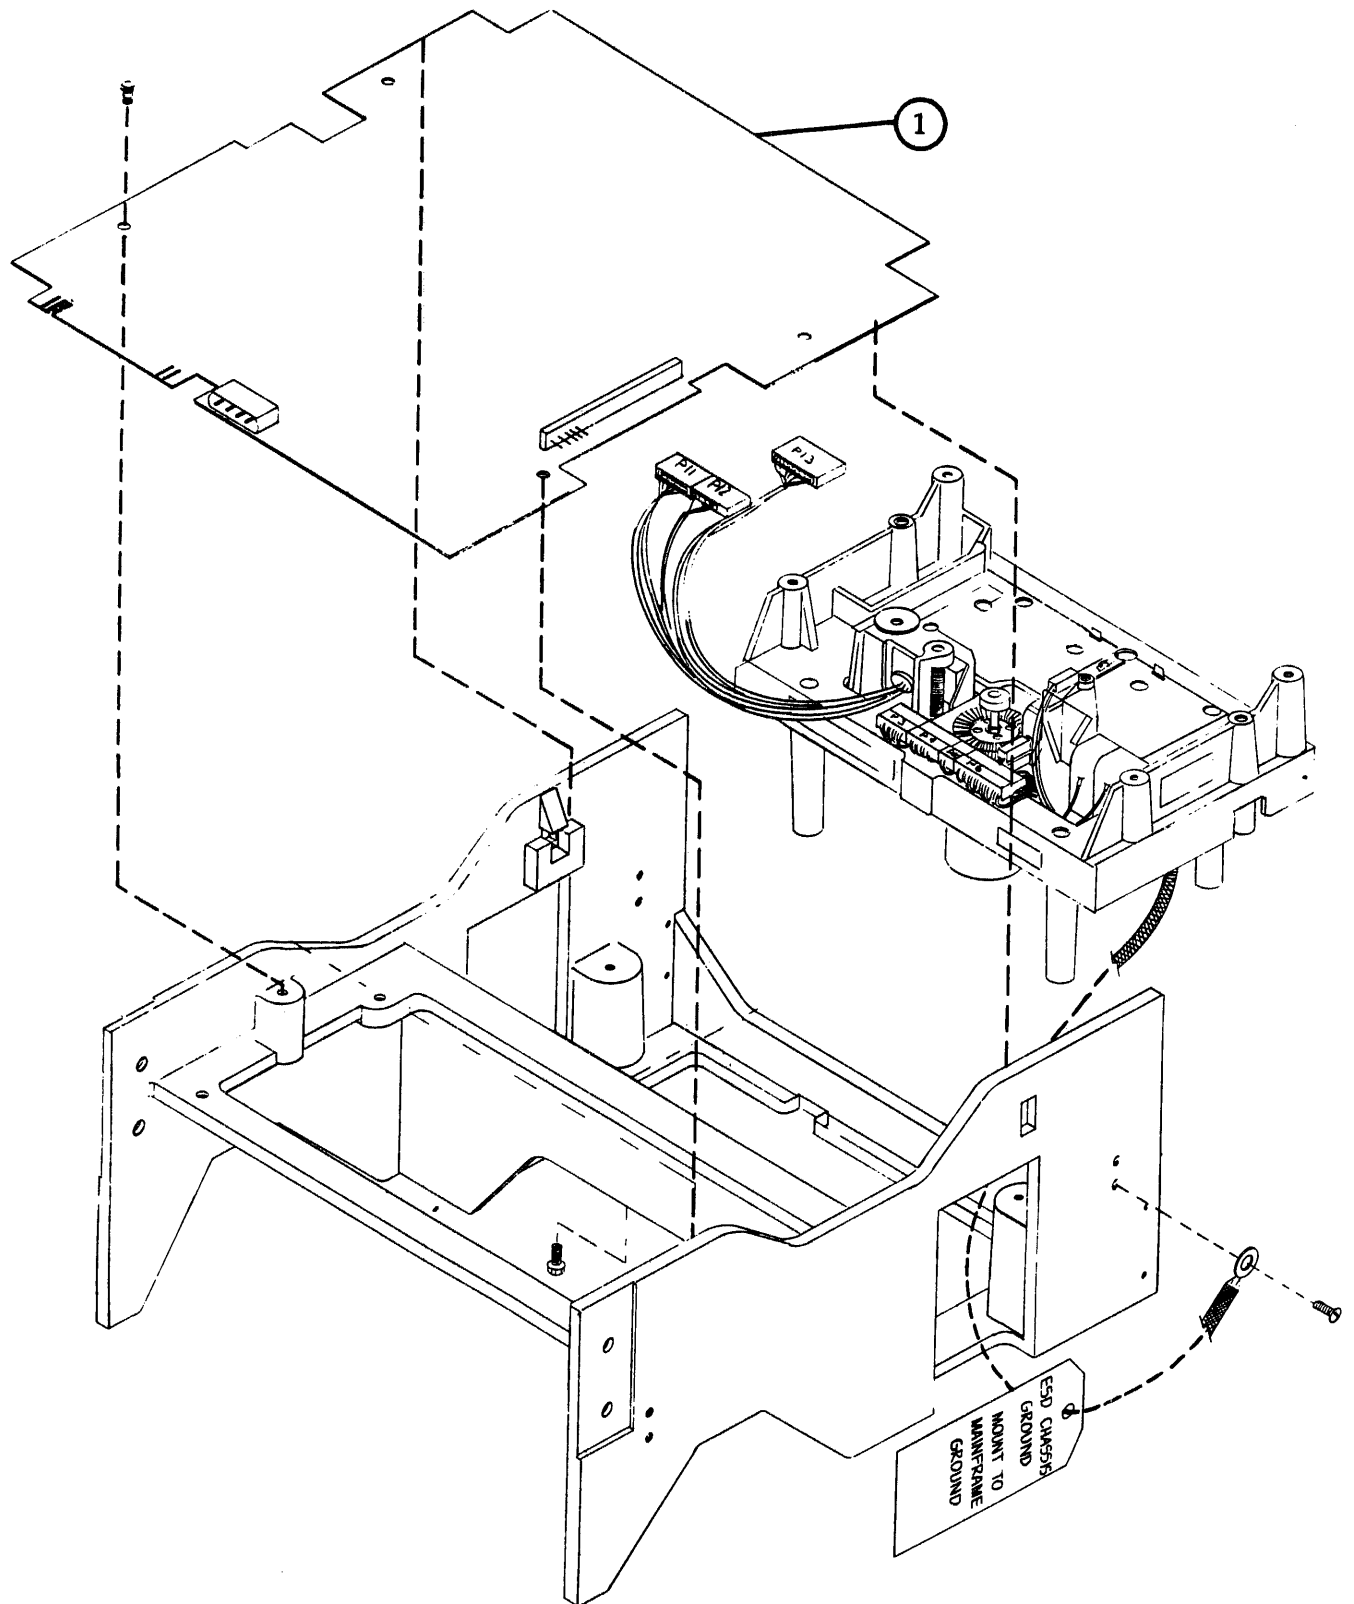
LSI Sidewinder Parts Location (Sheet 1 of 2)
